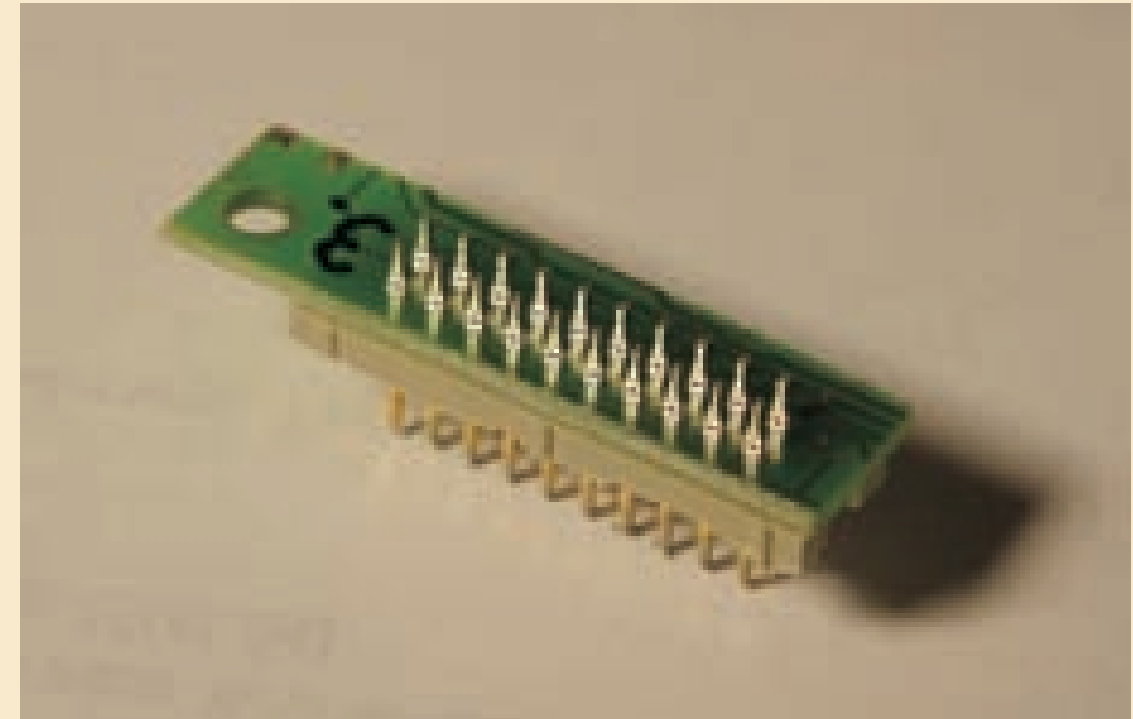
Connect assembly on printed circuit board cold assembled by press-fit technology.
